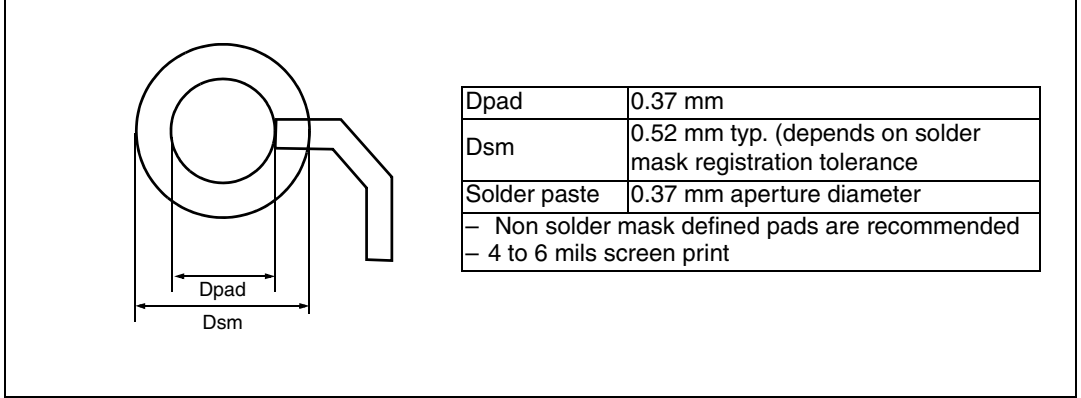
Recommended PCB design rules (0.80/0.75mm pitch BGA)
